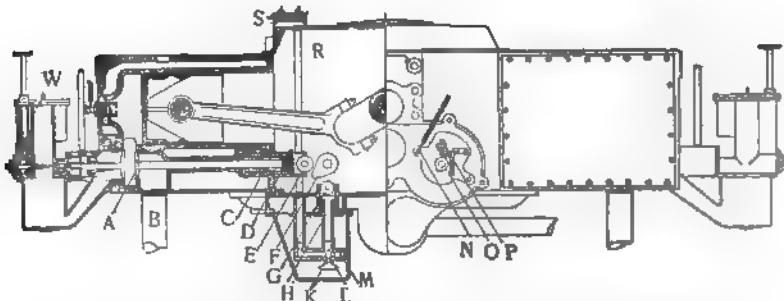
Sectional Diagram of the Winton Two-cylinder Horizontal Engine, showing details of valves and oil pump. A, exhaust valve; B, pipe leading exhaust gases to muffler; C, exhaust valve spring; D, set screw; E, roller engaging cam, F, which also engages with roller, G, and operates oil pump; piston, H; K, filter for oil forced from pump; L, ball valve on oil pump; M, by-pass for excess of oil from pump; N, primary wire from coil to breaker box; O, spark cam; P, contact adjusting screw; R, vertical pipe for oil forced from pump; S, oil conduit and adjusting screws to regulate flow of parts; W, pin projecting from float in carburettor. This cut also shows the shape and position of the carburetters, of the inlet valve air-line relief pipe, and the sparking plug. The hand wheels and spindles rising from the carburetters serve to regulate the maximum output of gasoline at each suction stroke.
